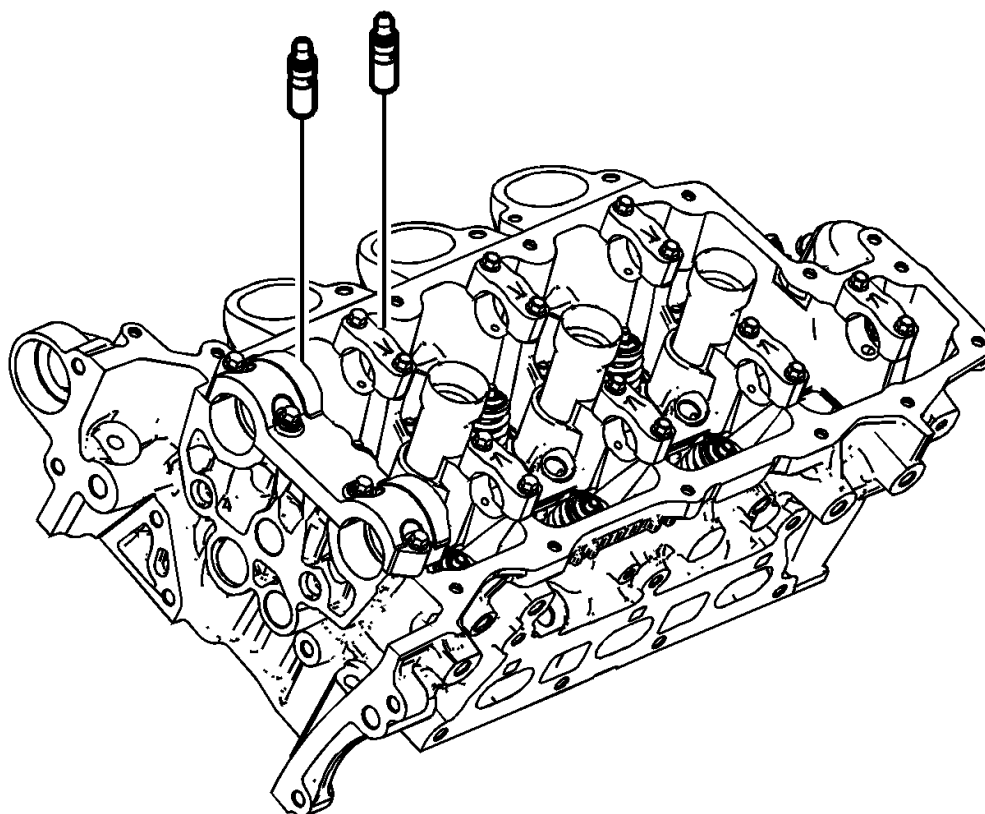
Valve Lifter Removal - Left Side (LLT)
